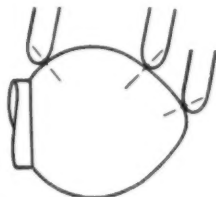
Sketch showing how contact point of tool varies for different points on a contoured workpiece.
